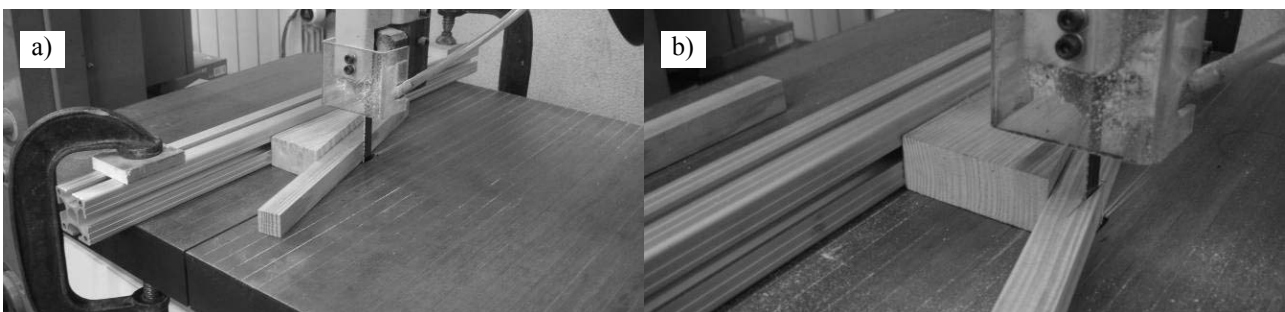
Cutting setup and specimen before (a) and after cutting the crack (b).
